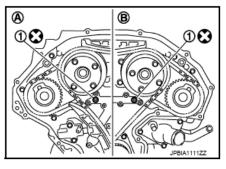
Identifying O-Rings On Rear Timing Chain Case (Bank 1 And 2) Courtesy of NISSAN MOTOR CO., U.S.A.
